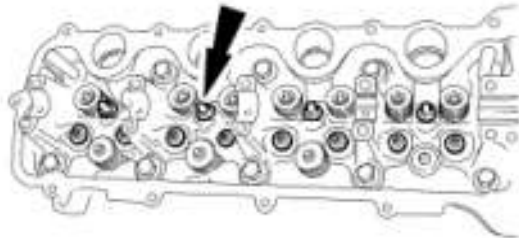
Identifying Cylinder Head Remover/Installer (303-572)
